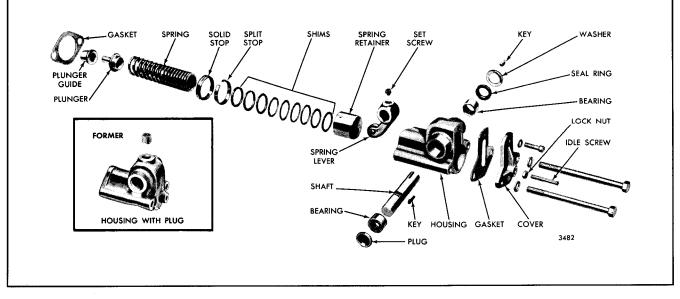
Variable Speed Spring Housing and Shaft Details and Relative Location of Parts
